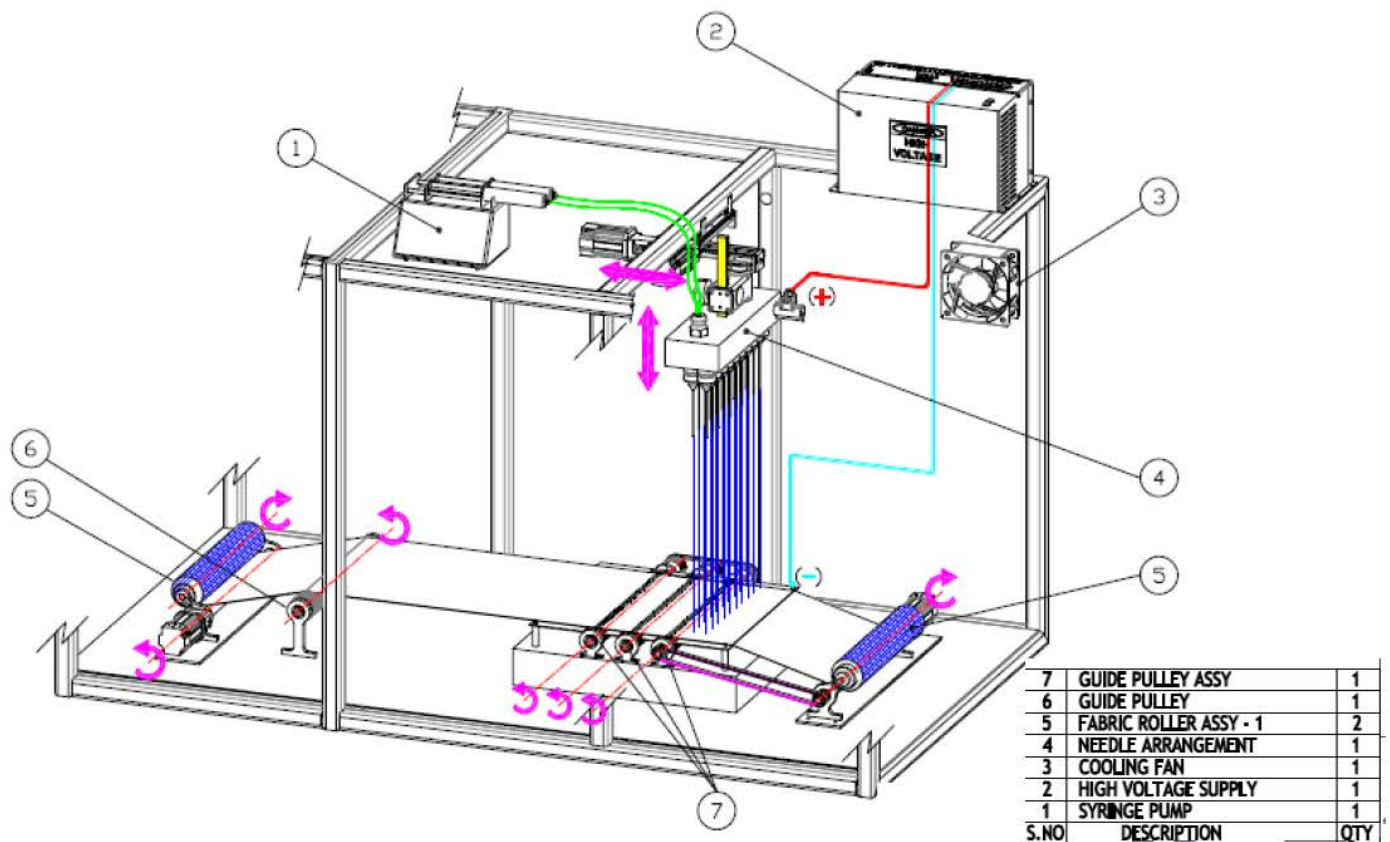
3D View of Multi-Syringe Electro-spraying Machine
